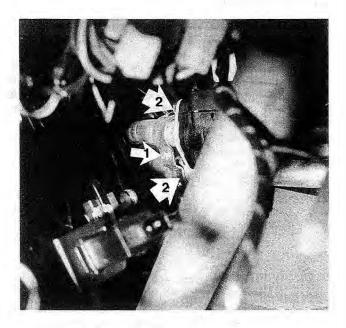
Heater valve clamp (1) and flange bolts (2).
